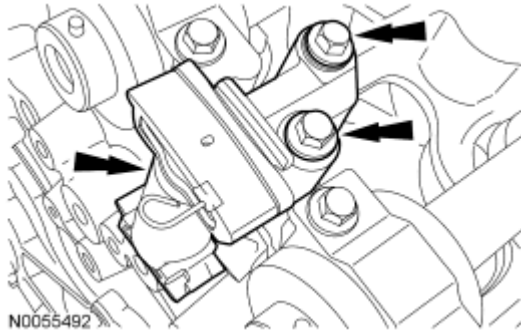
Locating LH Secondary Timing Chain Tensioner & Bolt
